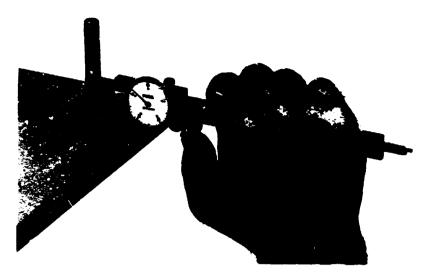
Caliper for centre-to-centre and centre-to-edge measurements of holes, with conical heads
